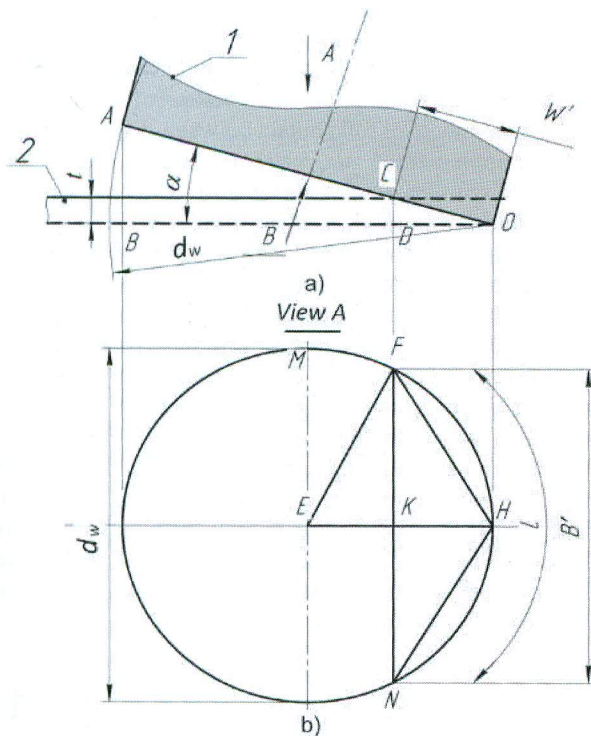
Scheme for calculating the contact area parameters of wheel cutting surface and workpiece
